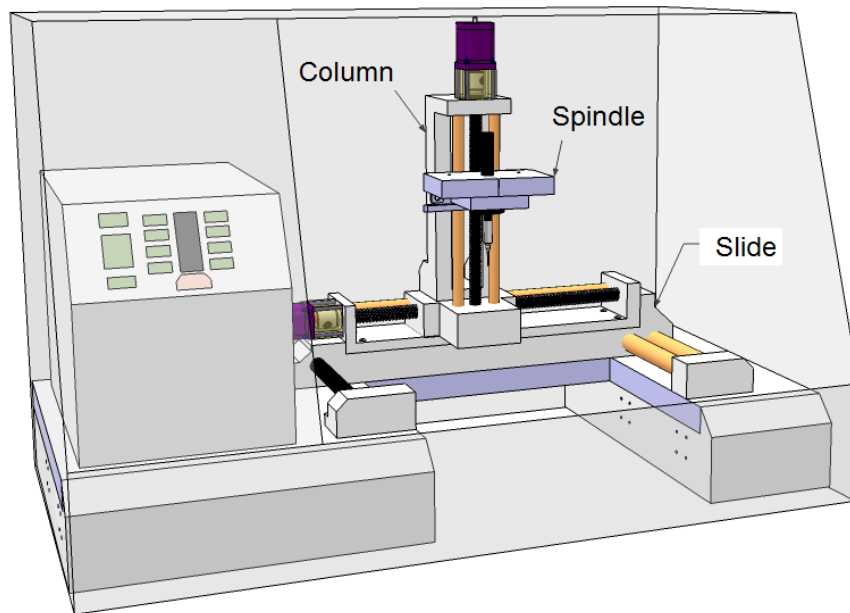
CAD model of a simplified three-axis CNC machine tool.
